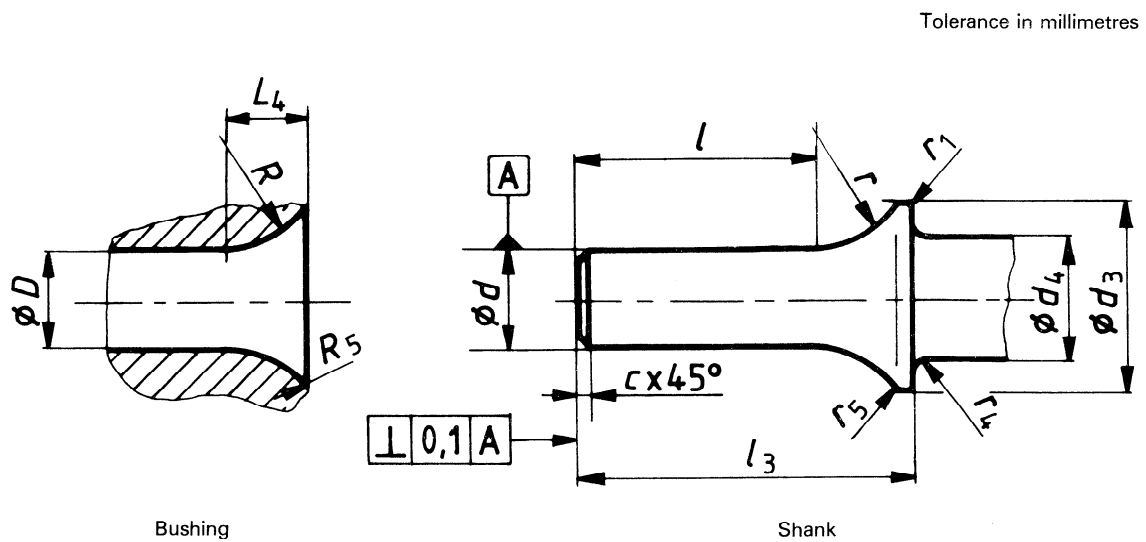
Rivet snap shanks and corresponding chuck bushings, tapered
